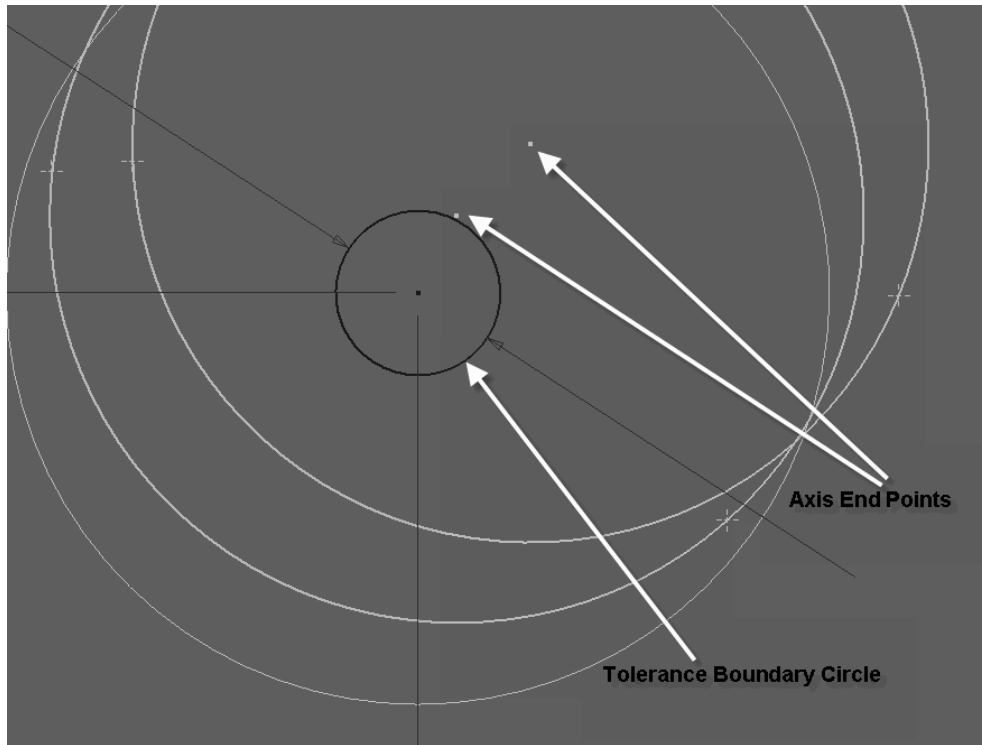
Examining the inspection points and the tolerance boundary.
